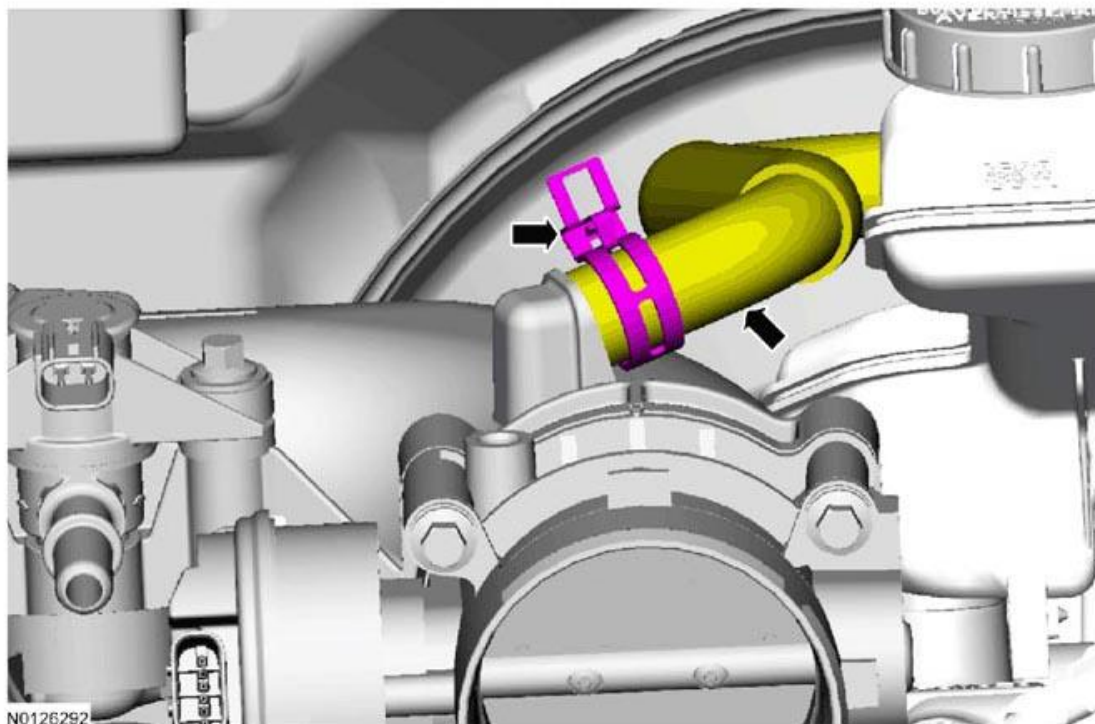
Locating Crankcase Ventilation Oil Separator Tube And Intake Manifold Bolts
